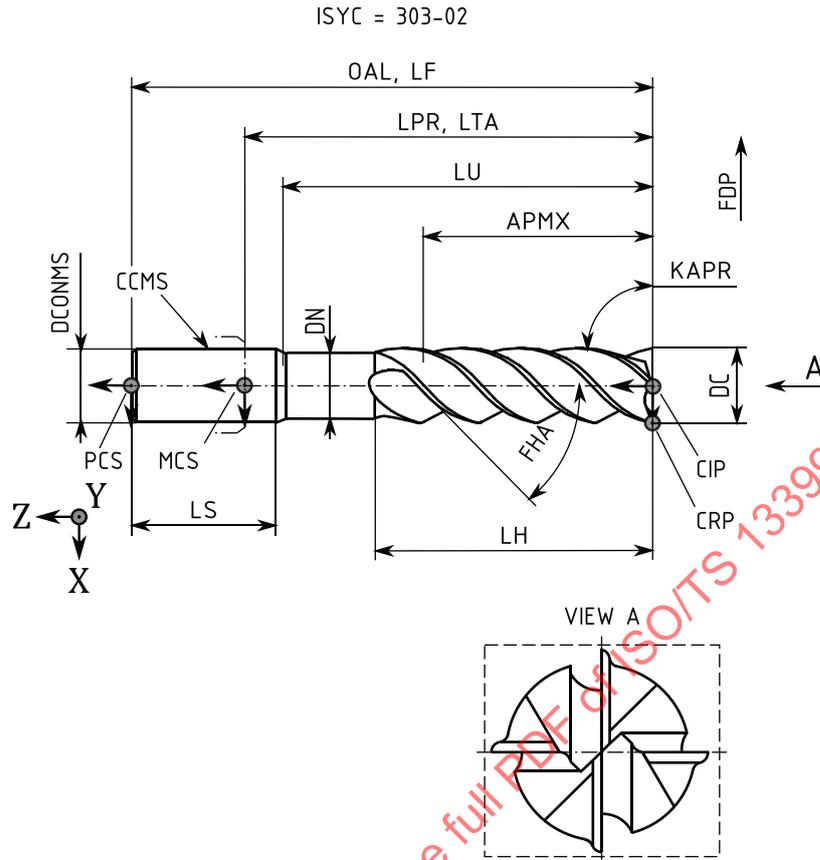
ISYC 303-02 - Centre cutting end mill, solid
